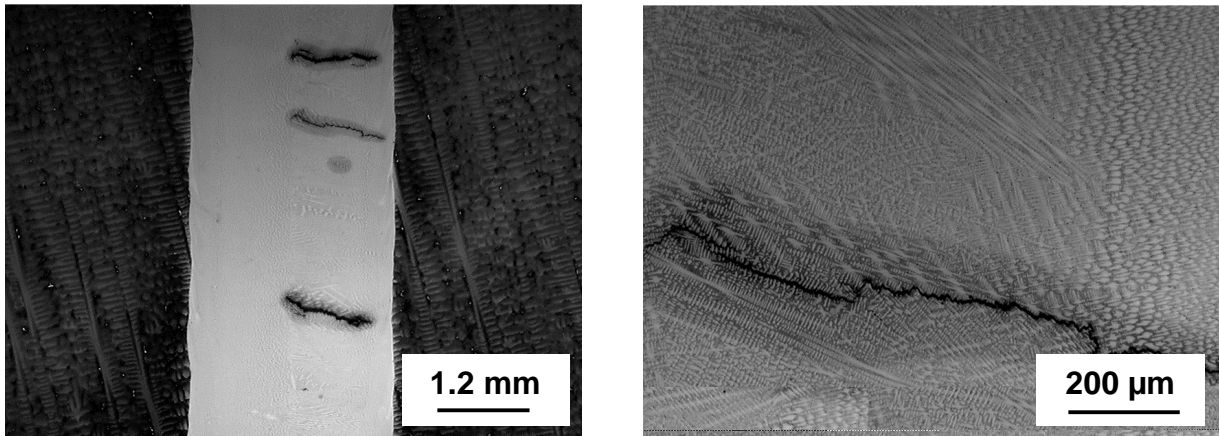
Top view of laser welded Rene N5 showing cracking behavior (left) on only one side, where stray grains were found (see Fig. 2) and higher magnification view (right) showing cracks follow along stray grain boundaries.
